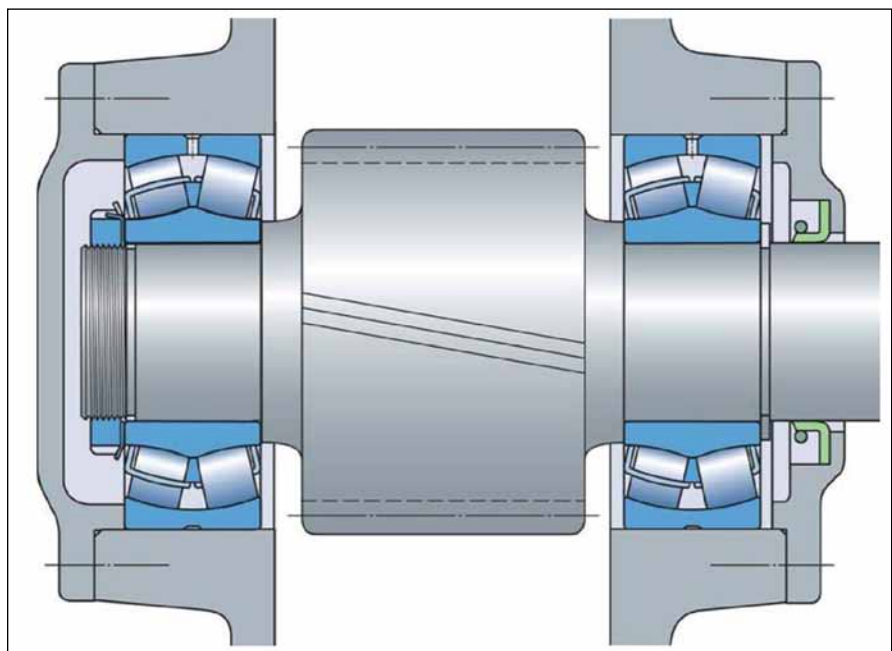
Two spherical roller bearings in “cross-locating” arrangement.
